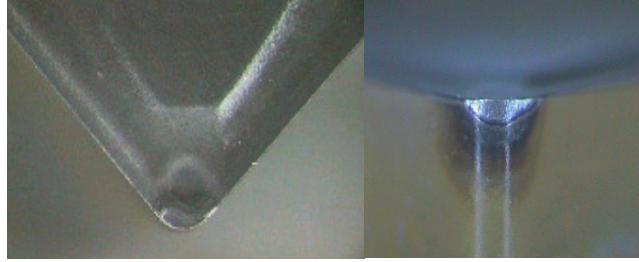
Tool wear on insert KF 3215 when finish turning ADI G3.
